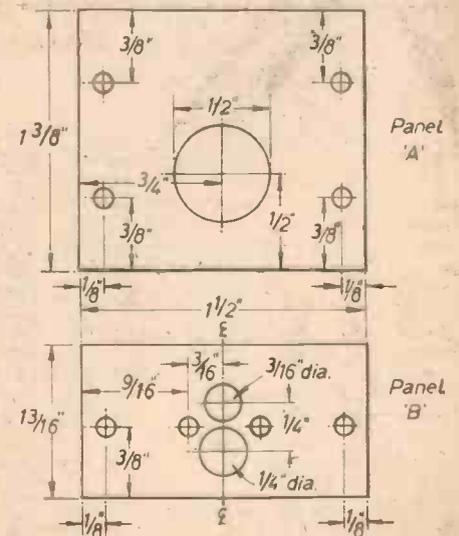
Details of the Paxolin panels; all holes are 8 B.A. clearance except where marked.
